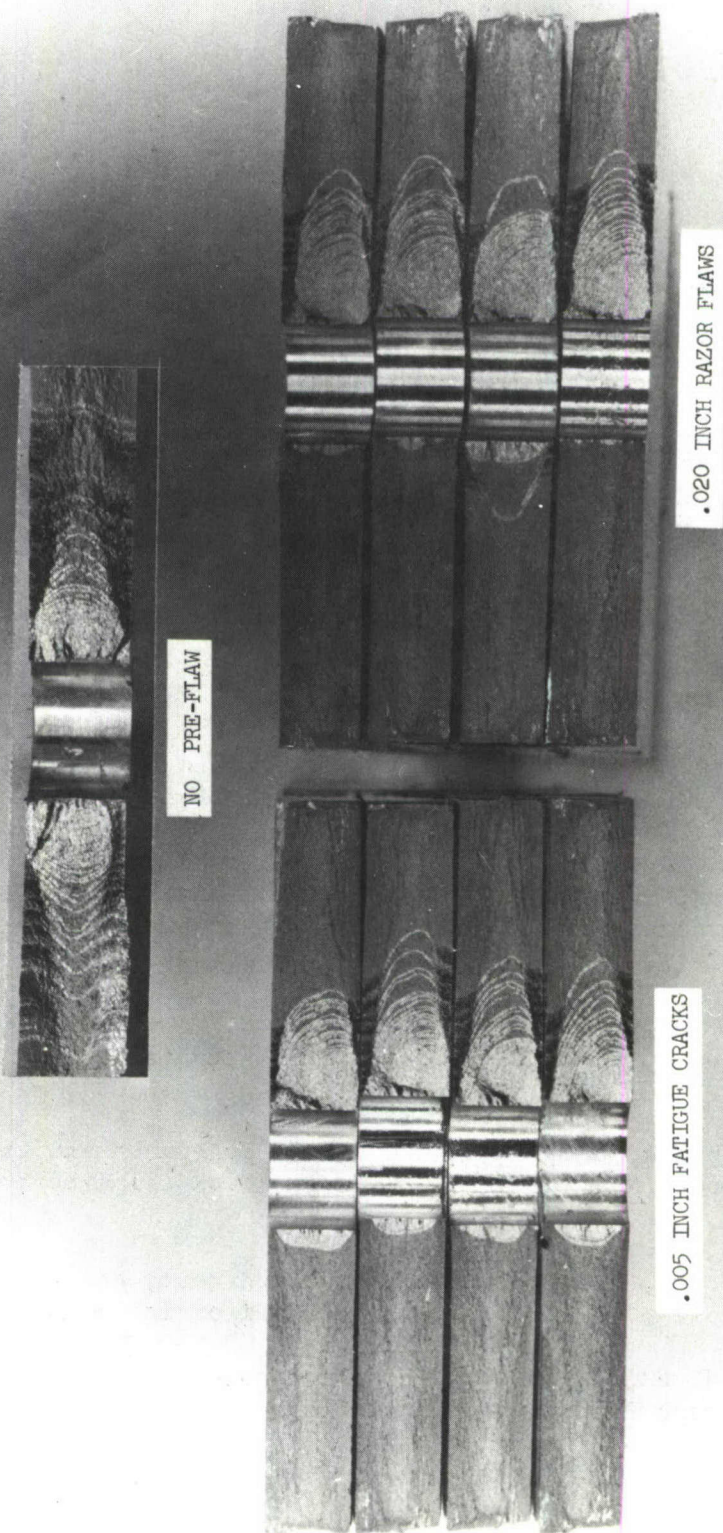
Fracture Surfaces Showing Equivalent Flaw Front Shapes for 0.005-Inch Cracks and 0.020-Inch Notches
